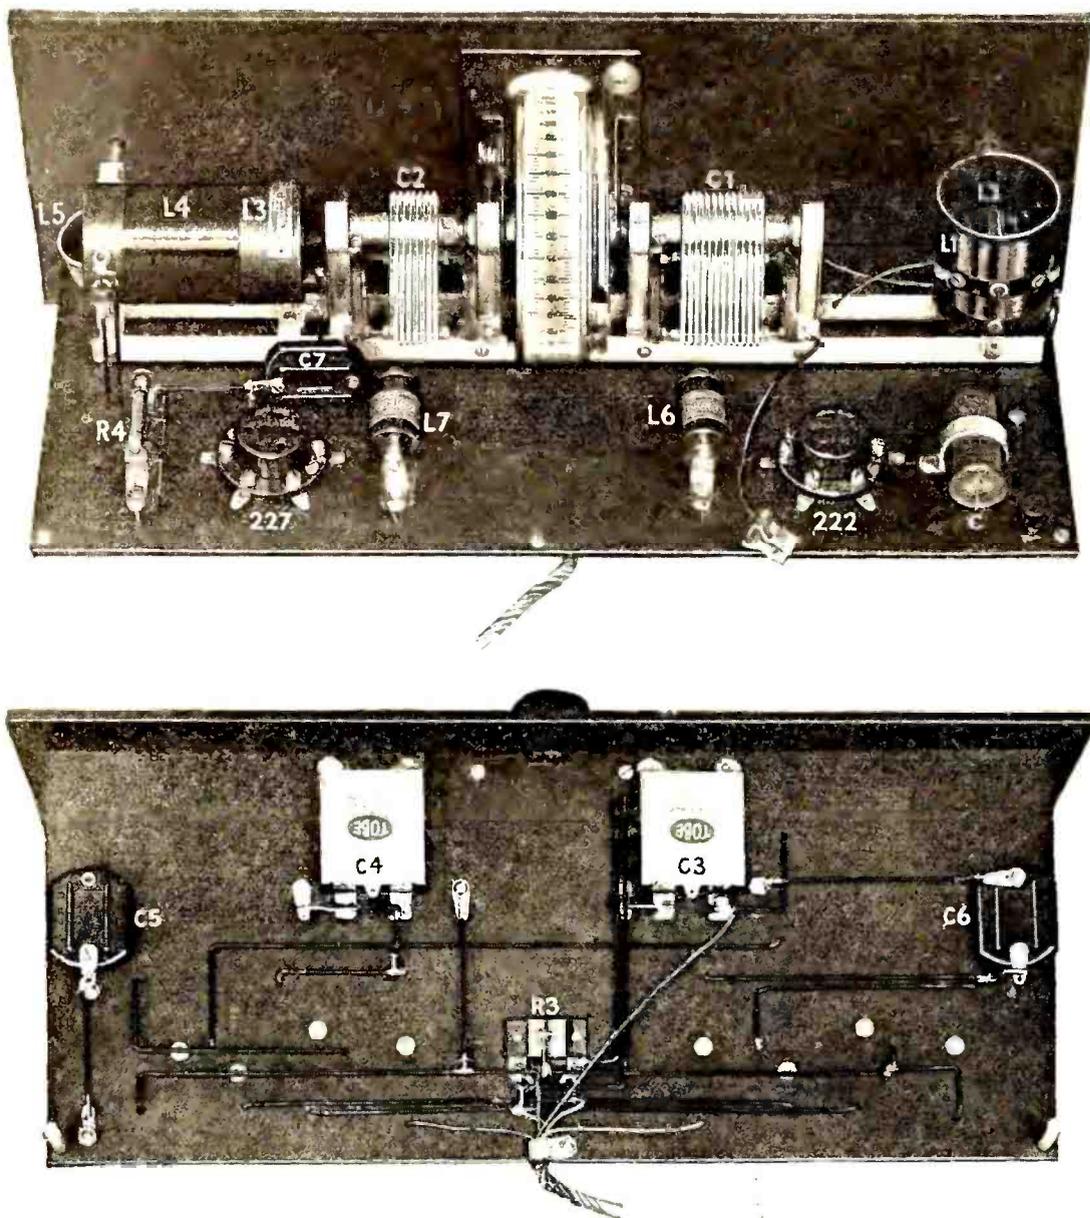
TOP AND BOTTOM VIEWS OF THE TUNER
